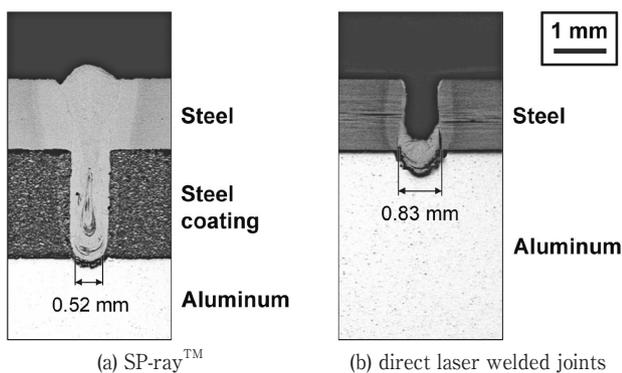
Cross-section image of (a) SP-ray™, (b) direct laser welded joints
